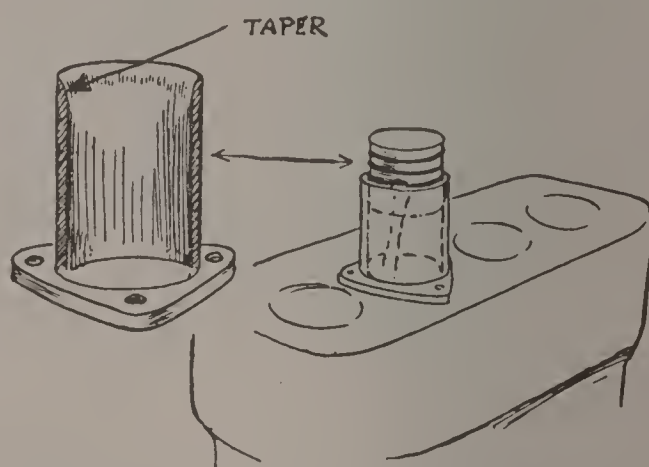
A Simple and Easily Made Jig for Replacing Pistons in Detachable Head Motors
